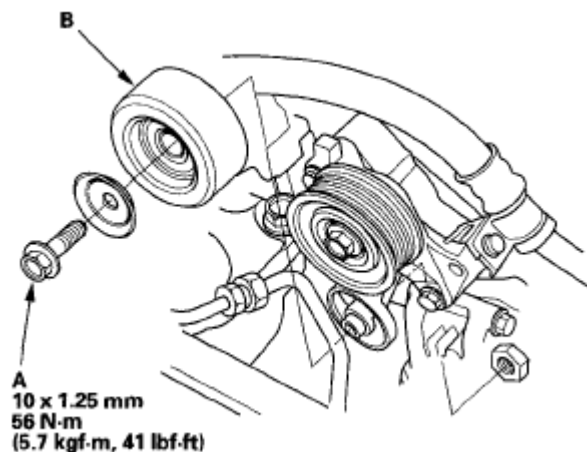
Removing Pulley Bolt And Tensioner Pulley
